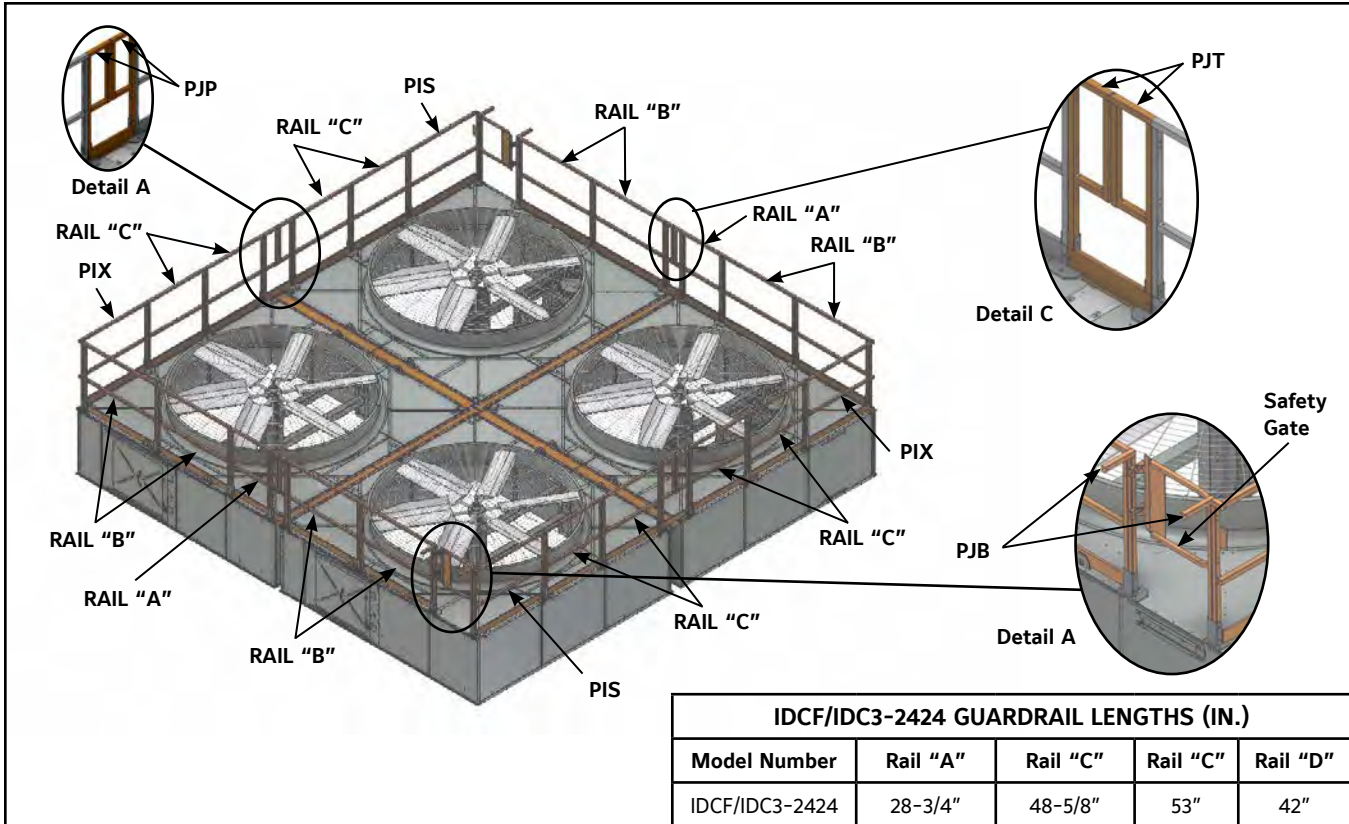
Top Perimeter Guardrails - IDC3-2424
